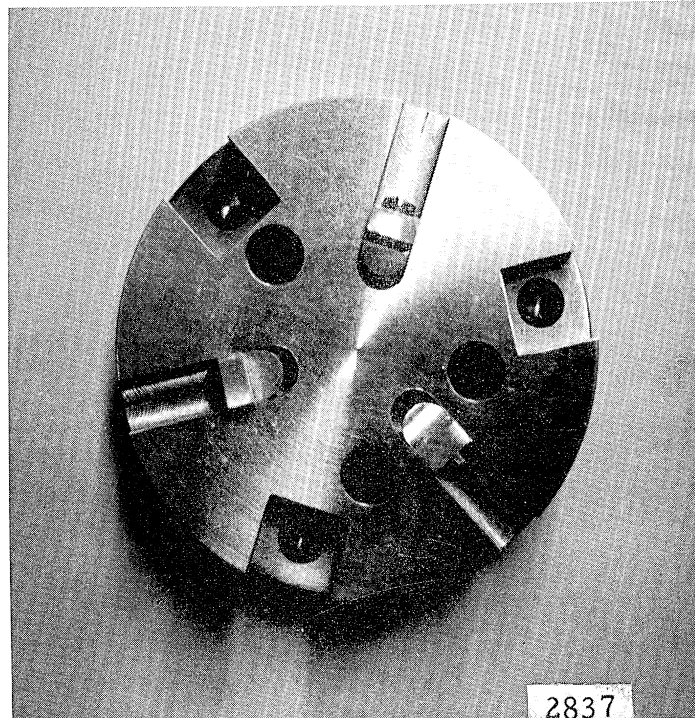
Specimen Adapter Used in Close Proximity Test for Shrink Fit Specimens
